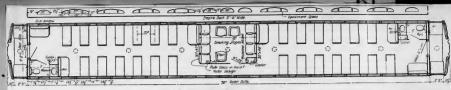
Floor Plan, New Coaches, Erie R. R.
